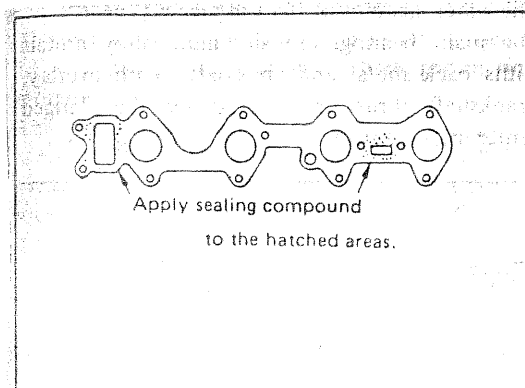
GG. Coating Intake Manifold Gasket with Sealant
